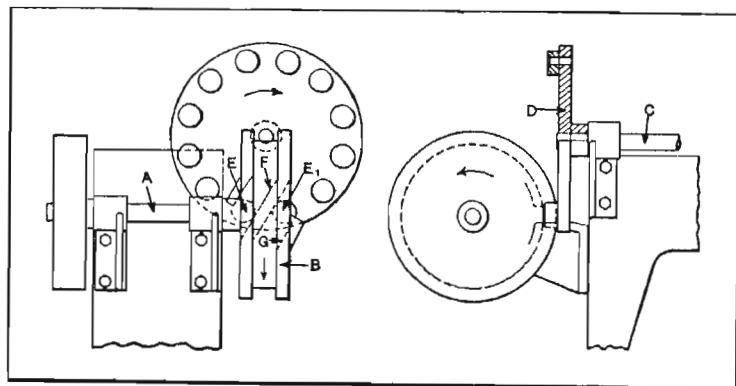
A Modification of the Type of Gearing Shown in Fig. 17
